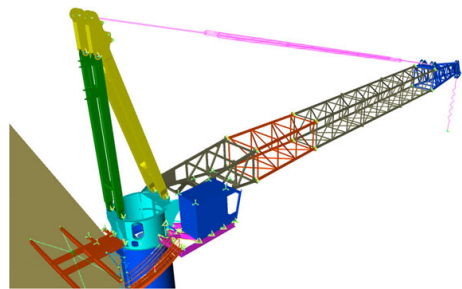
Tower crane installed on the oil rig Johan Sverdrup
